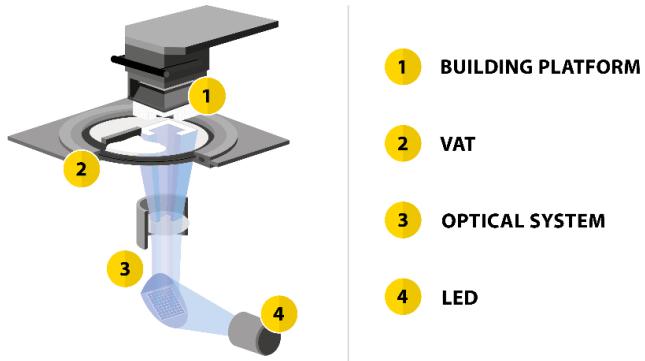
LCM machine for ceramic 3D printing - main components.
